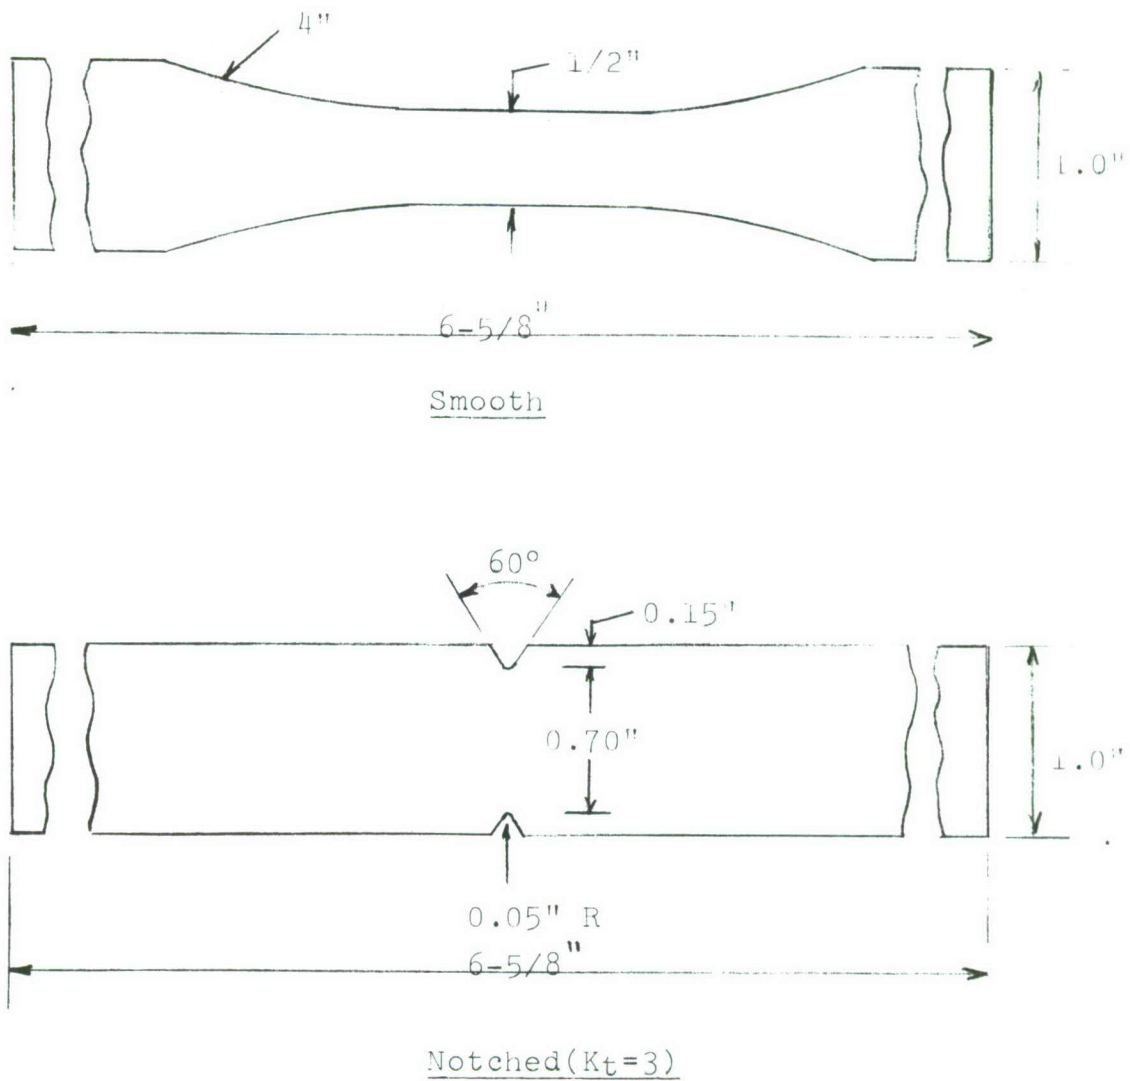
Smooth and Notched Sheet-Type Axial-Stress Fatigue Specimens.
